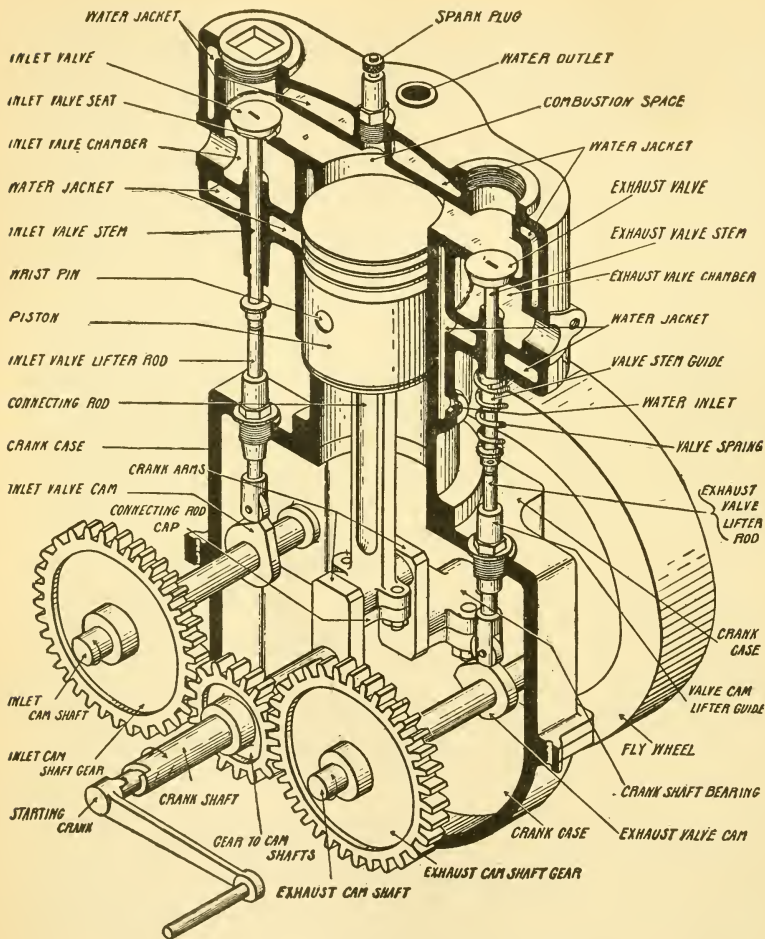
Sectional view of a four cycle gas engine showing the valve gear and other working parts. Both inlet and exhaust valves are mechanically operated. The location of the valves diametrically opposite each other, requires a separate cam shaft for each. These cam shafts are geared to the engine crank shaft, and they make one revolution to every two of the engine. When the inlet valve is operated by a spring and the engine suction, only one cam shaft is necessary, as illustrated in fig. 7.
